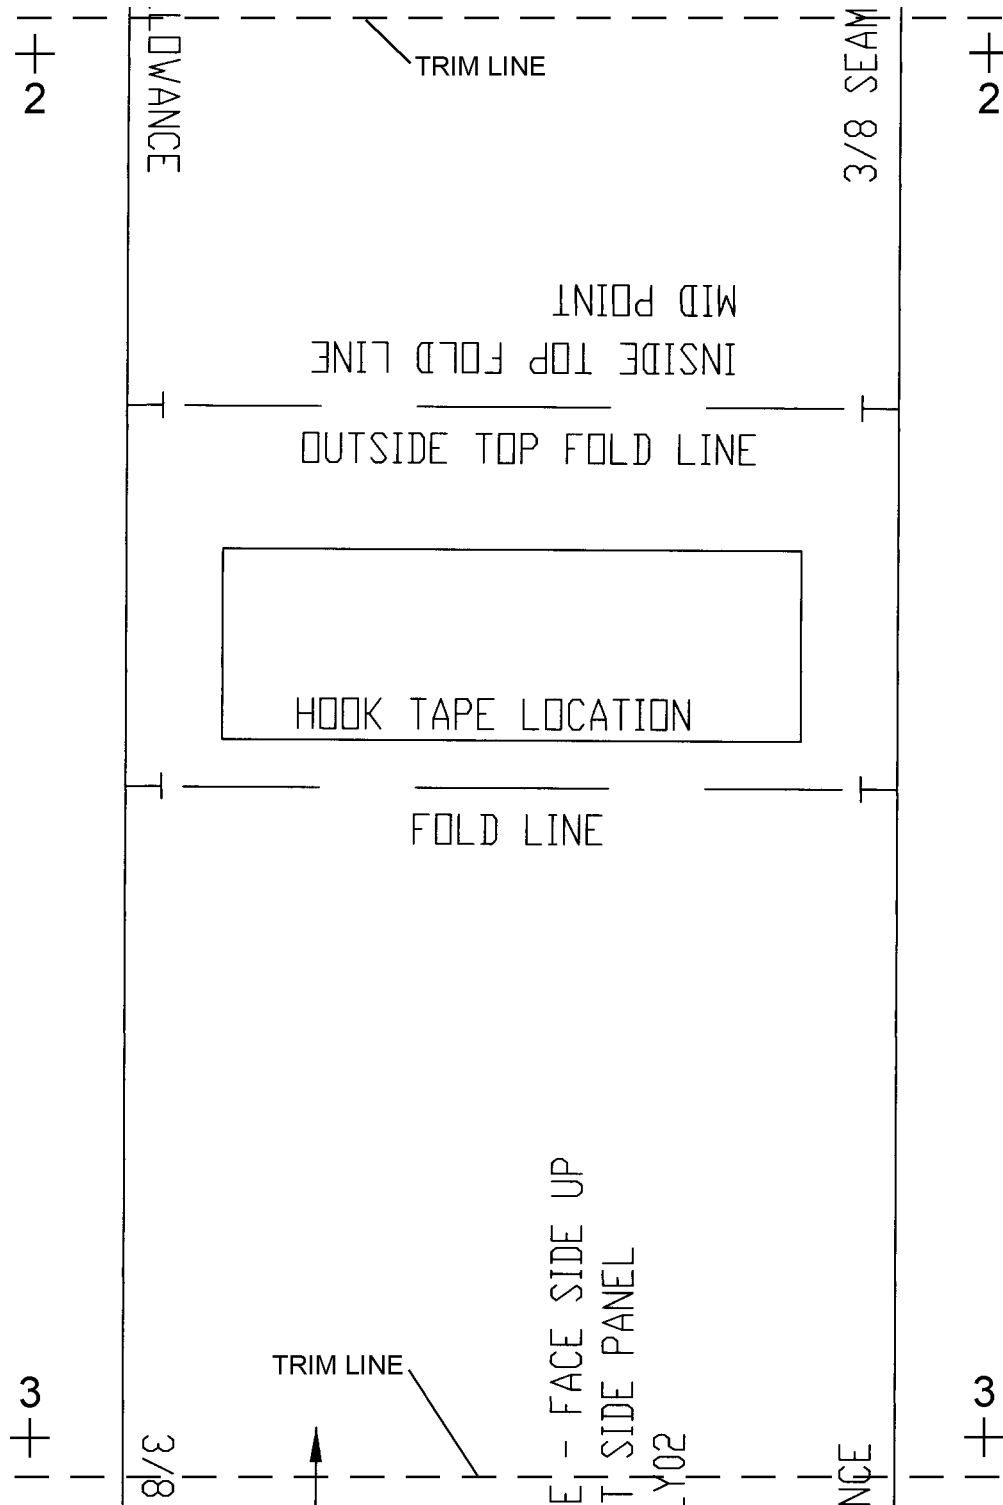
H. Flare Pocket Front Side Panel Pattern (Sheet 3 of 5)
